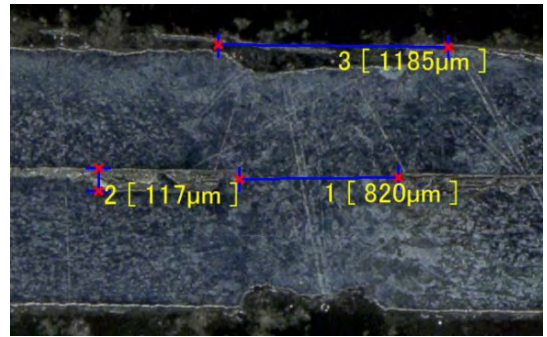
Picture of weld with spacer sheets, with 4 mm defocus
